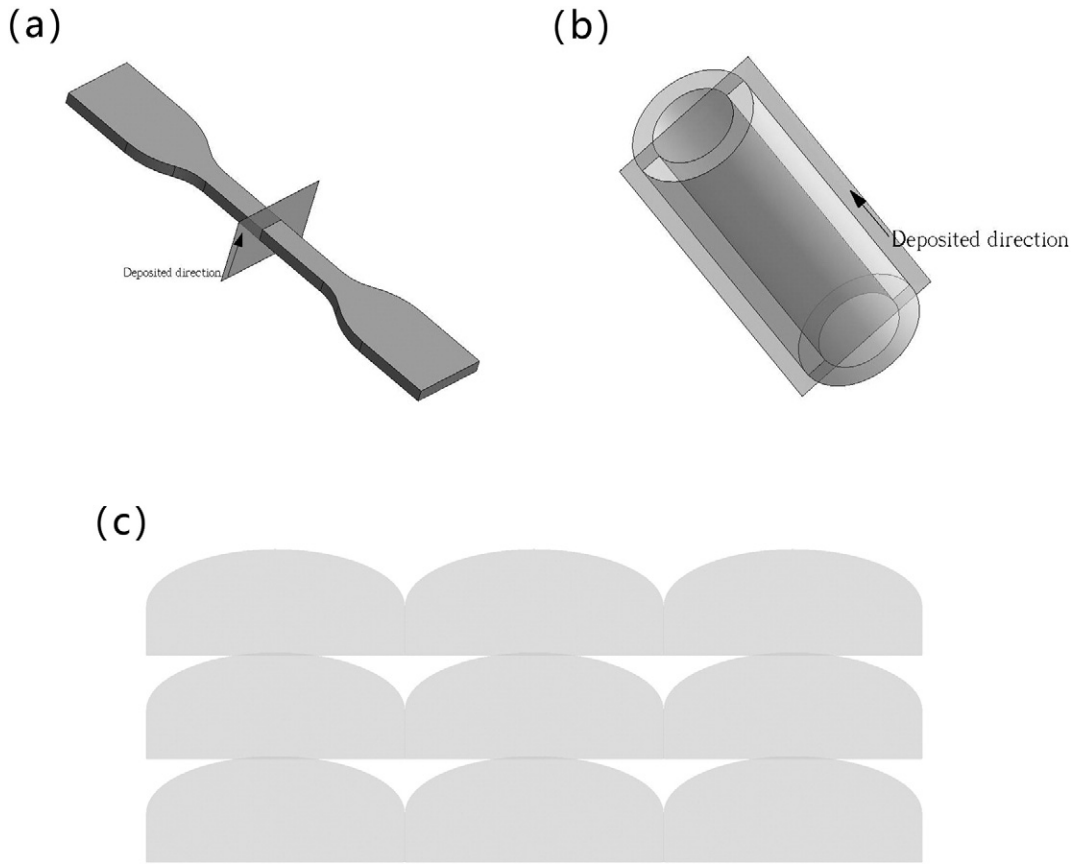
Types of specimens printed by FDM: (a) tensile; (b) compressive; (c) section topography of black rectangle plane in (a) and (b).
